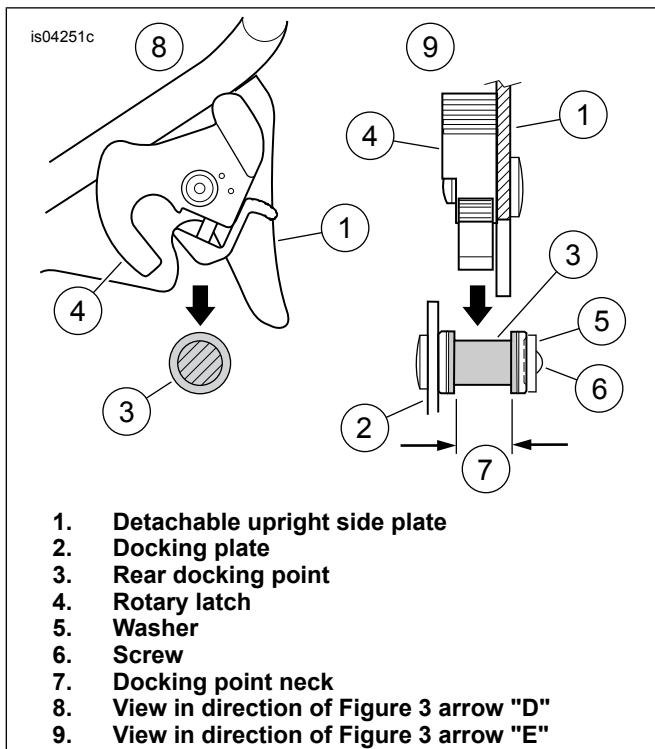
Proper Alignment of Latch in Rear Docking Point, Views in Direction of Figure 3 Arrows (D) and (E)
